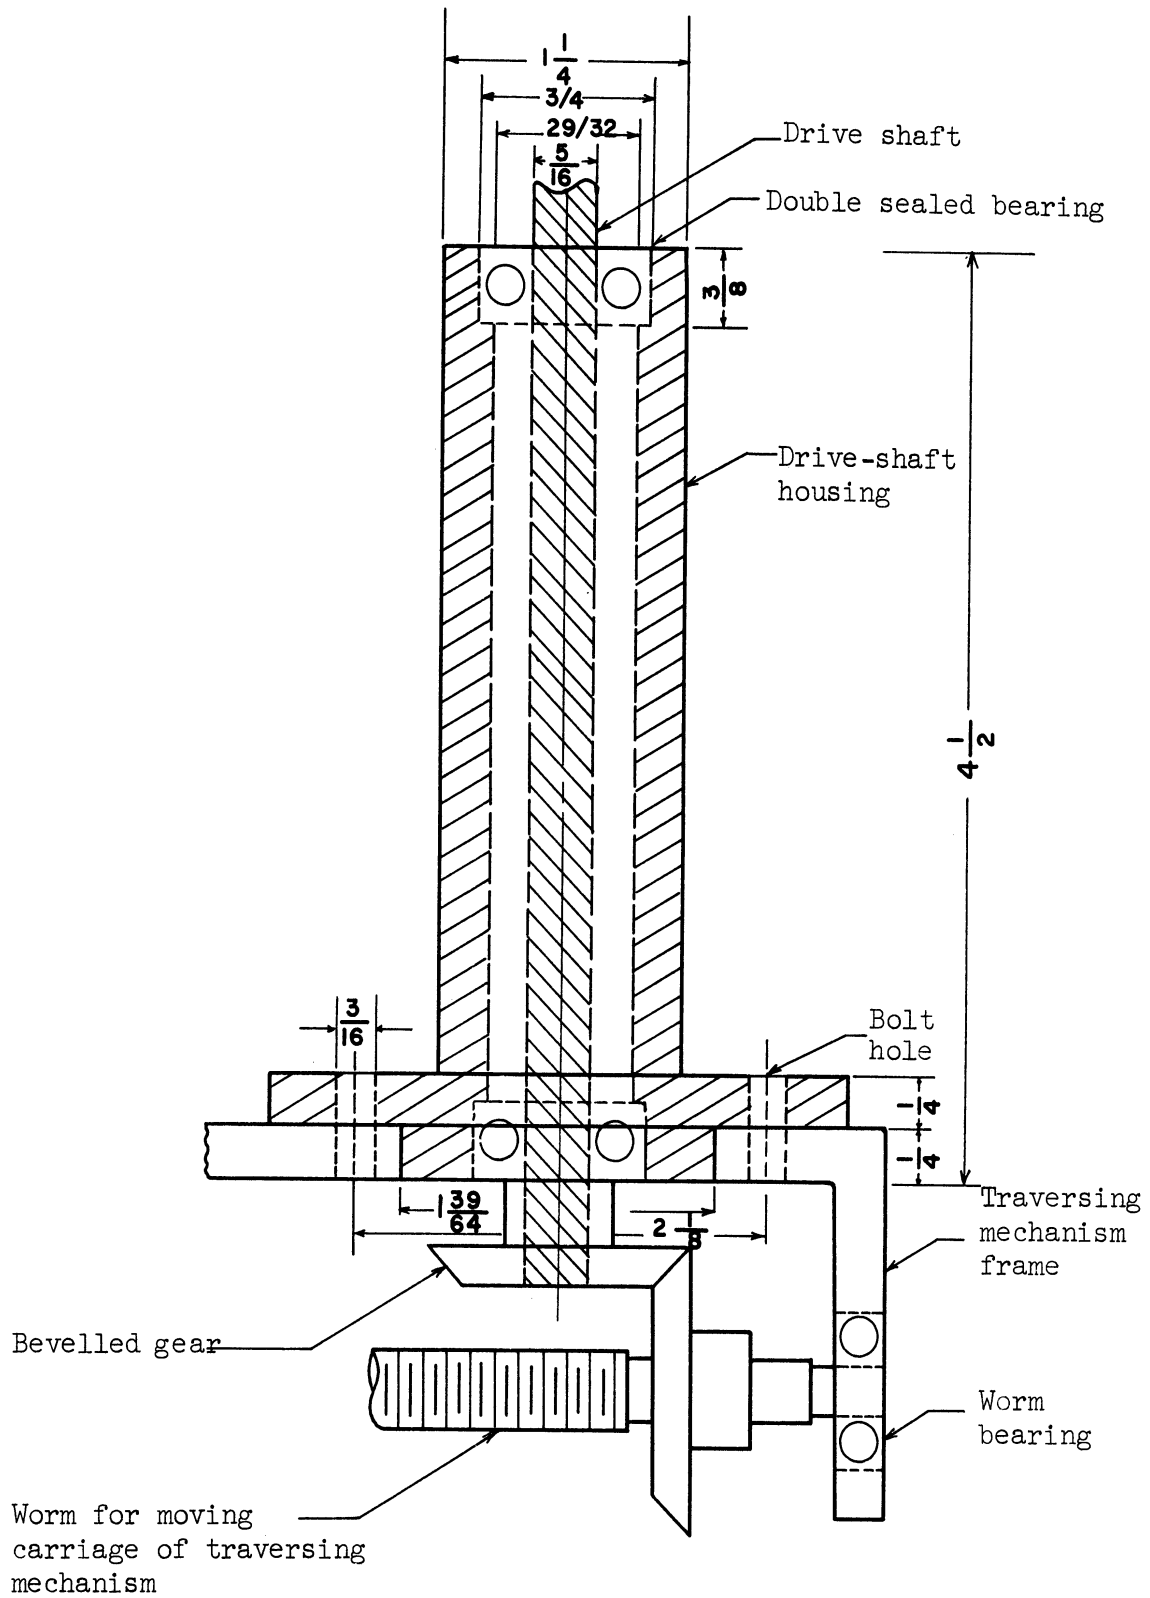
Drive-Shaft Housing and Linkage with Traversing Mechanism.
